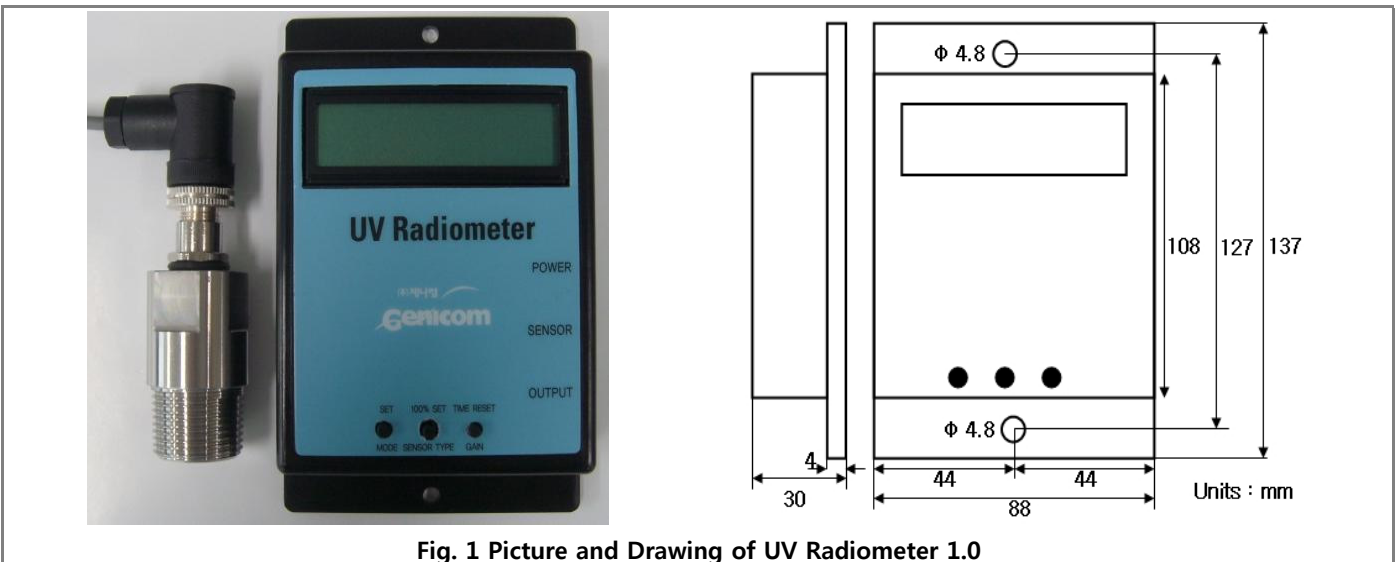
Picture and Drawing of UV Radiometer 1.0
